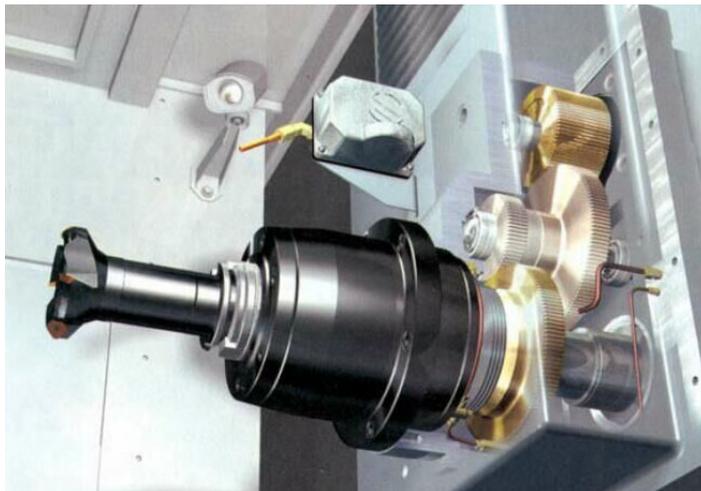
Haas EC-630 gear-driven spindle with two-speed gearbox (from Haas Automation).
